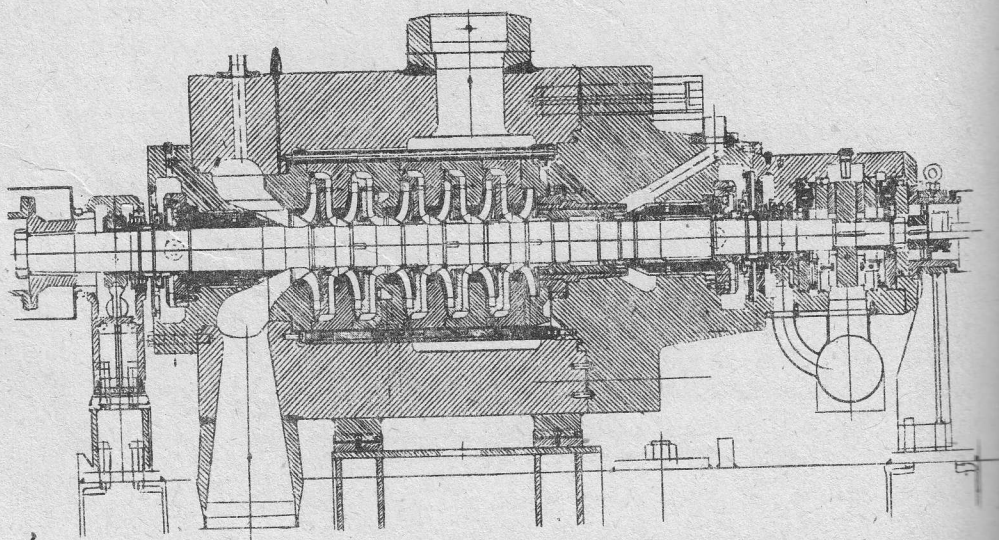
Sulzer (Switzerland) impeller pump of the HPT type with non-sectional casing
